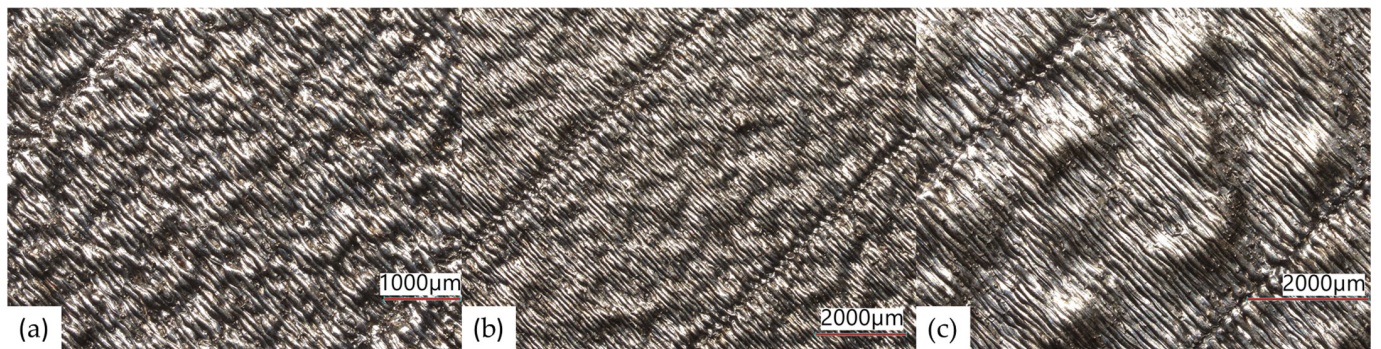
Top surface of (a) low-LED test piece (0.23 J/mm), (b) reference LED test piece (0.33 J/mm) and (c) high-LED test piece (0.50 J/mm).
